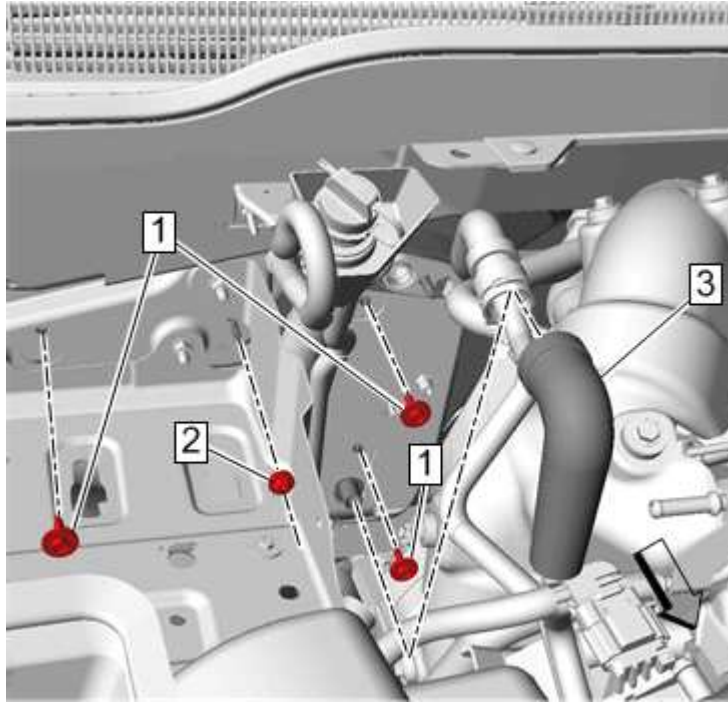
Heater and Air Conditioning Evaporator, Blower Module Bolt And Cowl Panel
